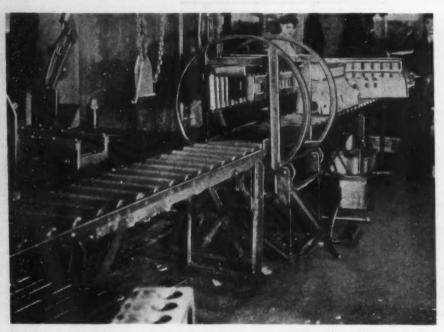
ROLLER CONVEYOR CONTAINING INVERTING SECTION
